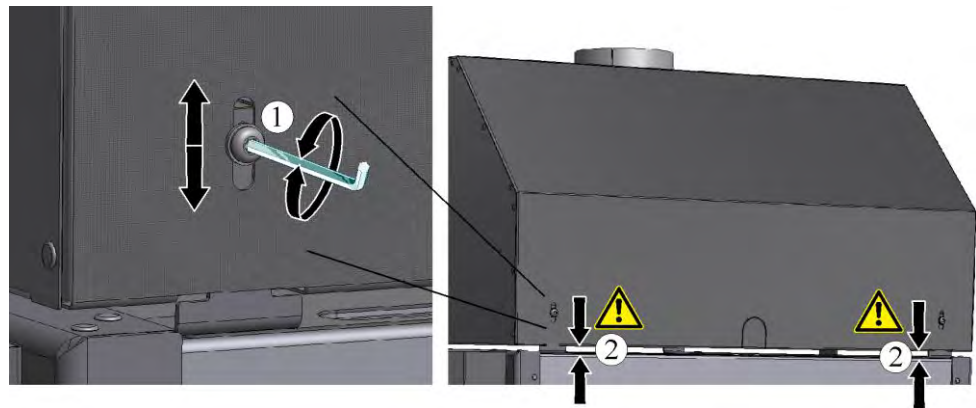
Setting the height of the exhaust hood (similar to picture)
